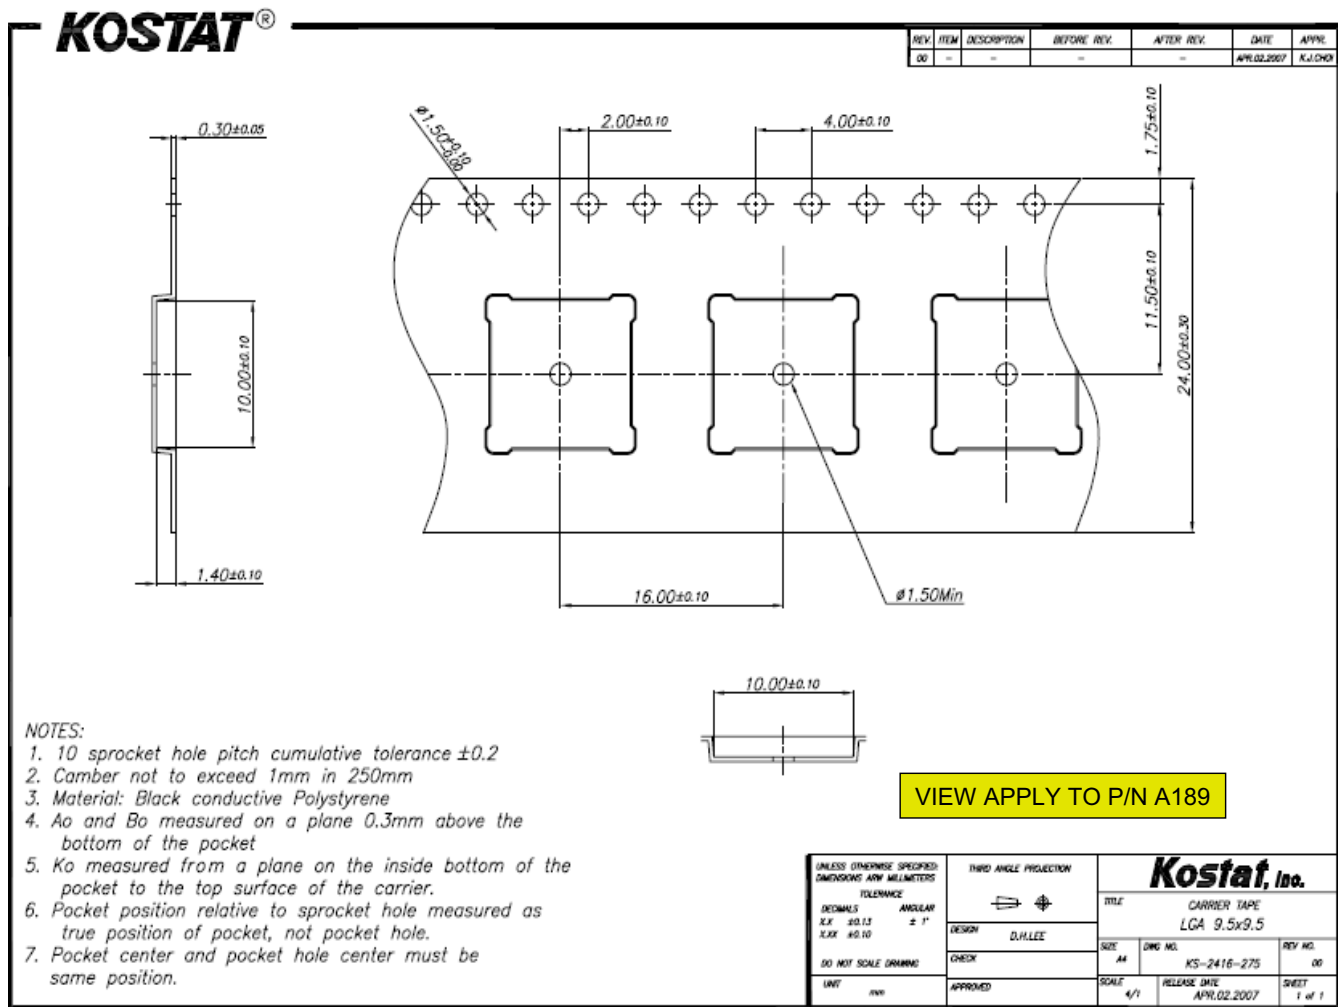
Example 99 Pin LGA Tape and Reel Detailed Mechanical
